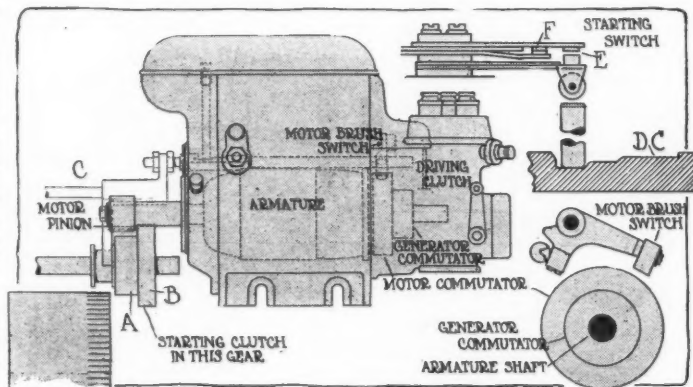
Left: Delco motor-generator showing starter gearing to flywheel
